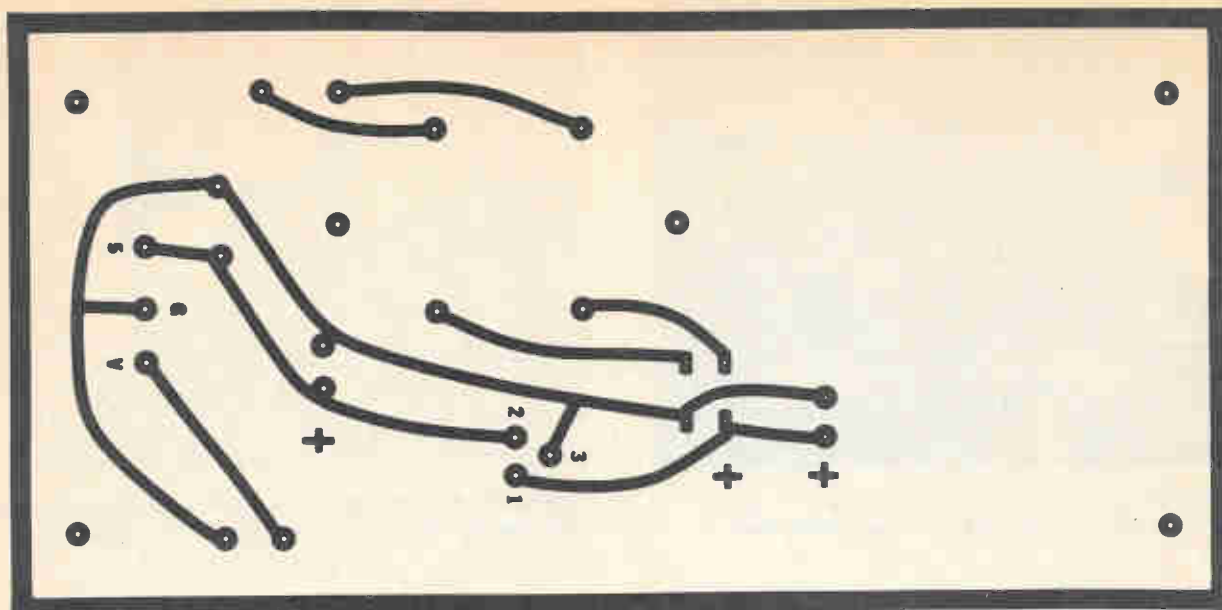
SAME-SIZE foil pattern used by the author to make his printed-circuit board.
